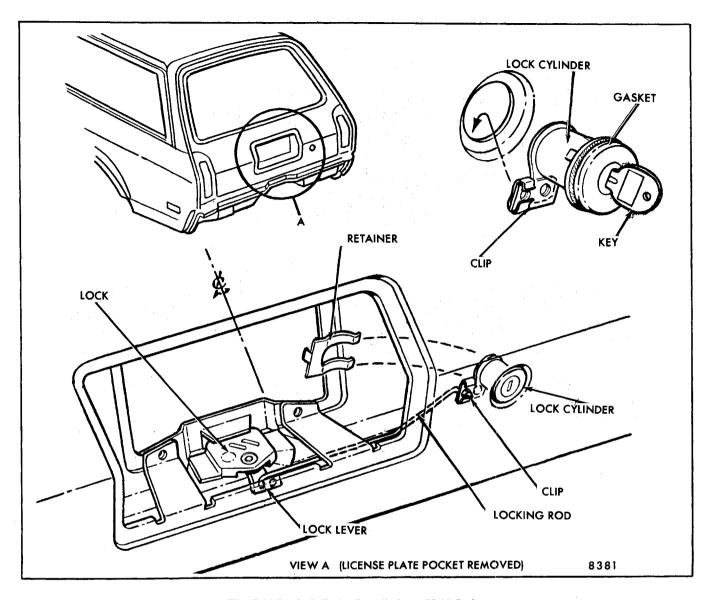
Lock Cylinder Installation - H-15 Styles
